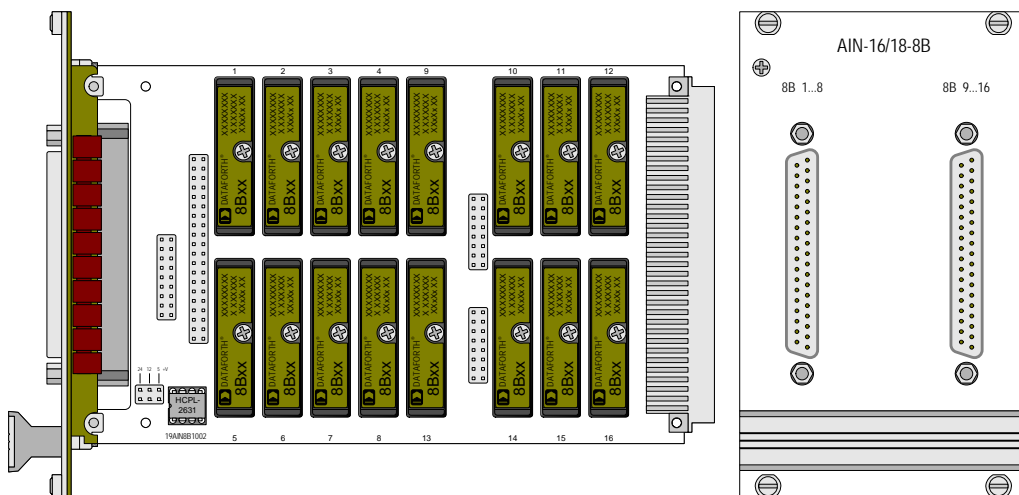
Pro II-AIn-16/18-8B Rev. E: Board and front panel
